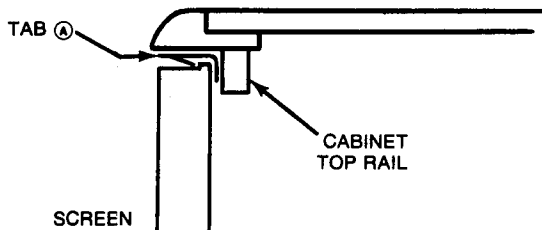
Cabinet Detail (Screen Removal) Models: 46GW950, P46100/150, P52150
